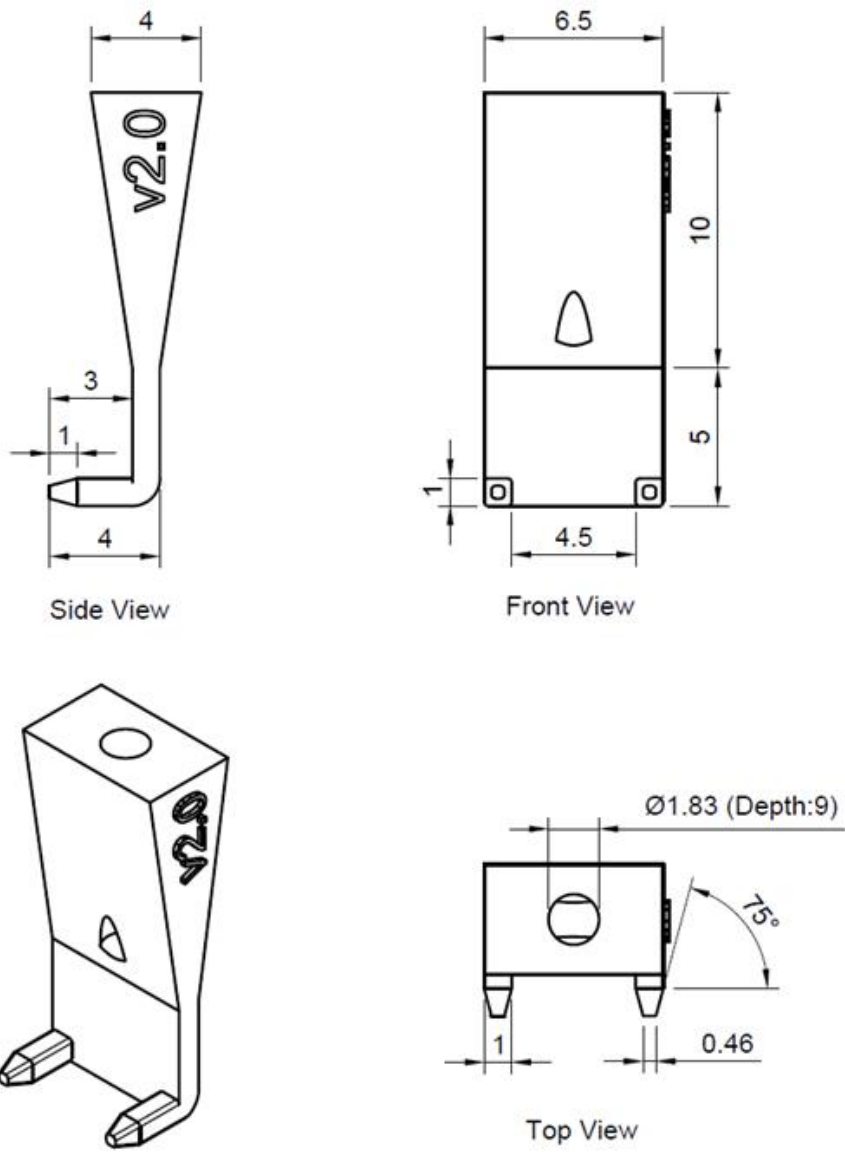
Design of the nerve-release tool. All dimensions are in millimeters (mm).
